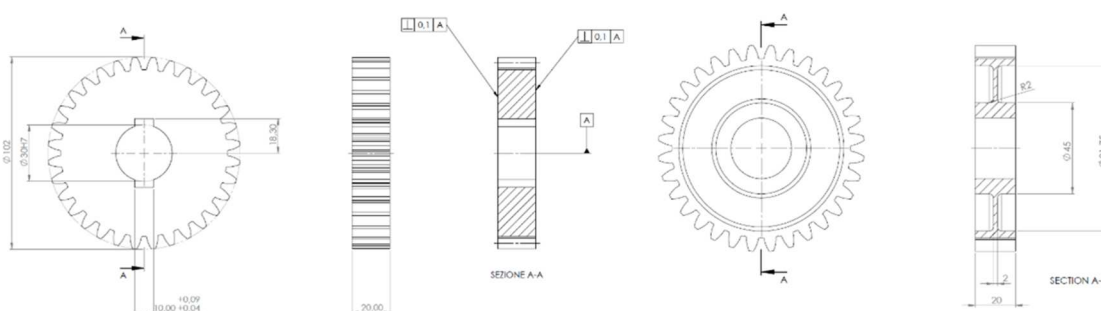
Technical drawings of *standard* (left side) and *thin-rim* (right side) gear.
